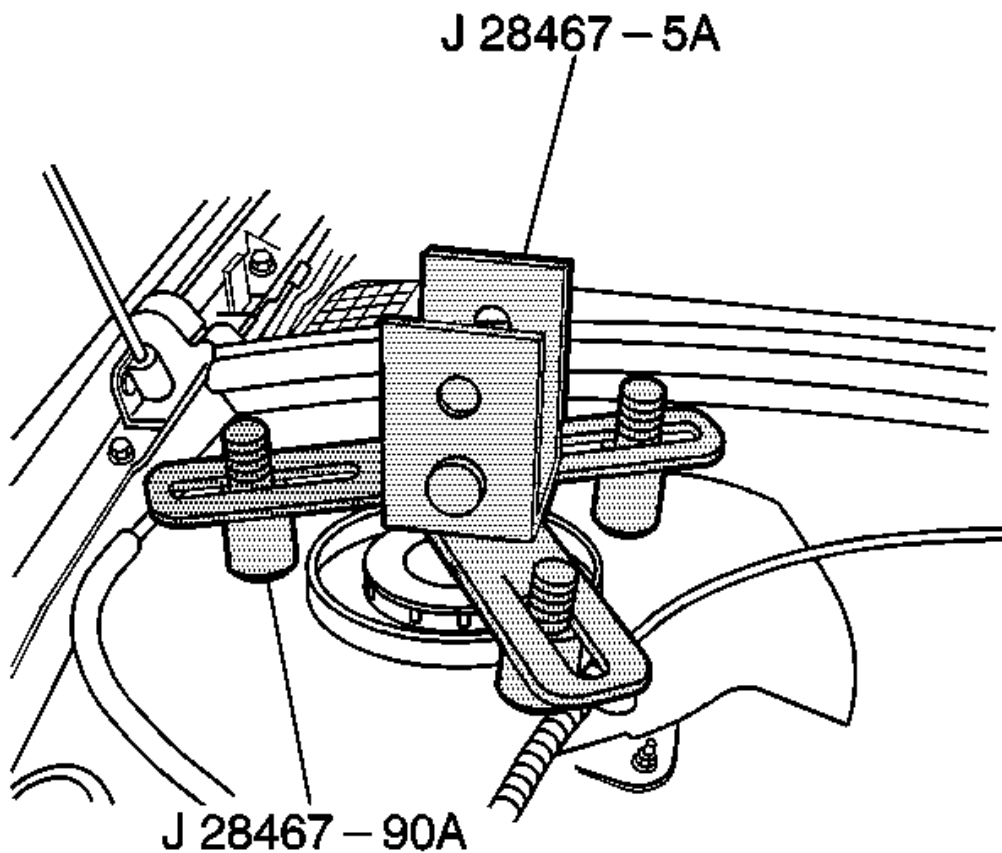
Installing Strut Tower Support Assemblies J 28467-5A Over J 28467-90A
